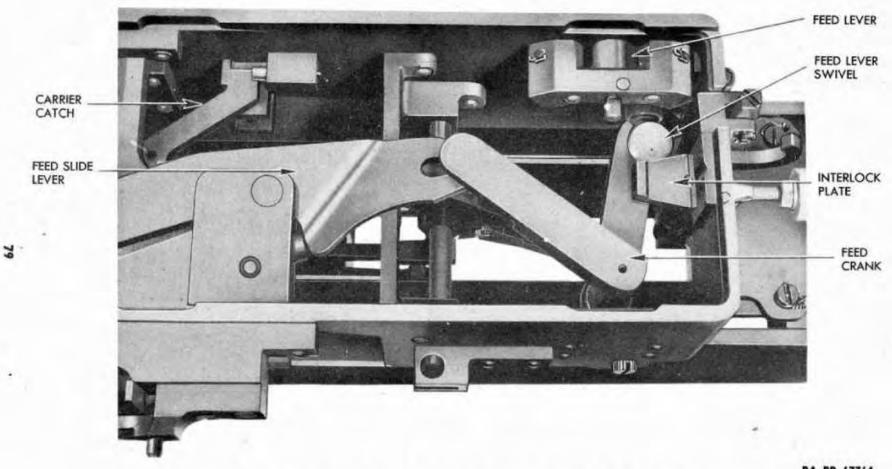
Feed Box Mechanism (Gun M10)—Rear Section
